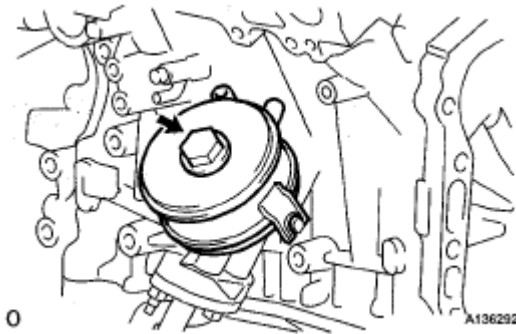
Removing Union Bolt, Oil Cooler Assembly, And O-Ring
